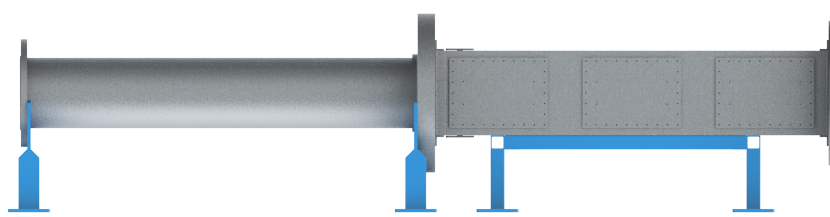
Full assembly of the variable Mach number planar nozzle.
